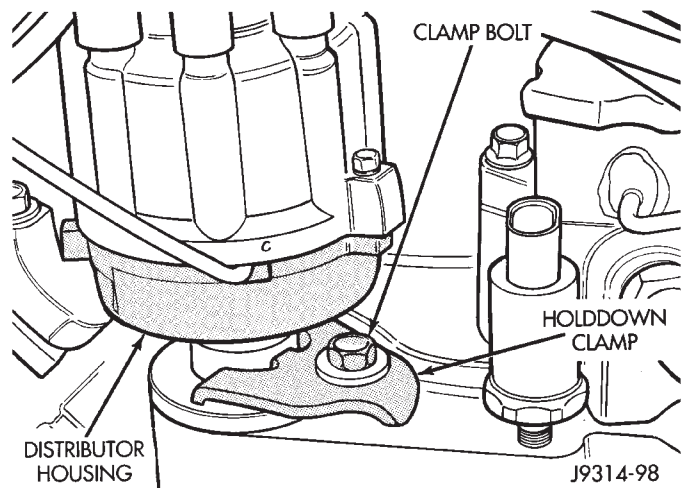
Distributor Holddown Clamp—5.2L Engine
